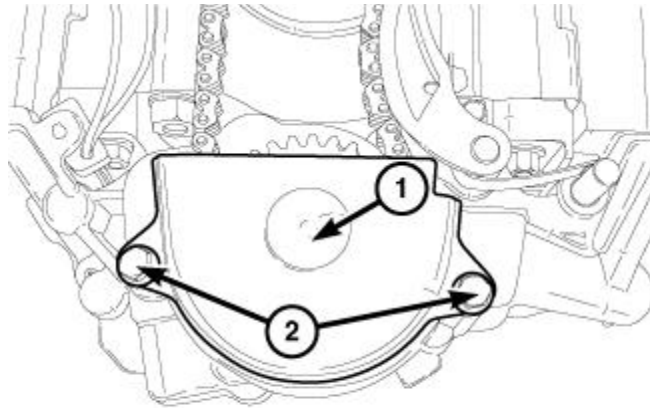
Oil Pump Solenoid Electrical Connector & Primary Chain Tensioner Mounting Bolt
